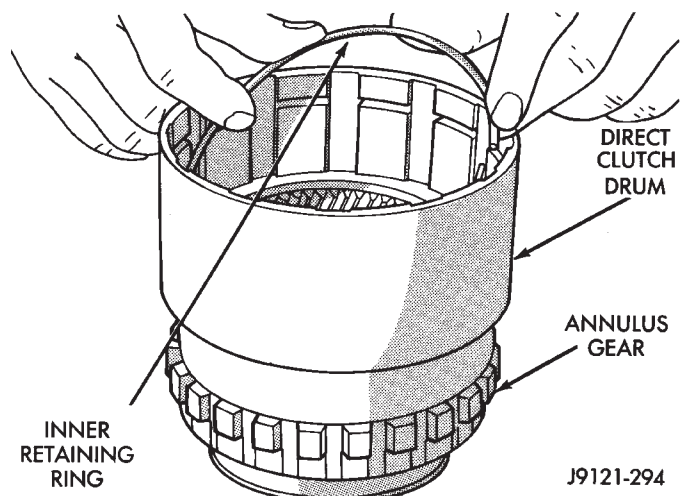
Installing Clutch Drum Inner Retaining Ring
